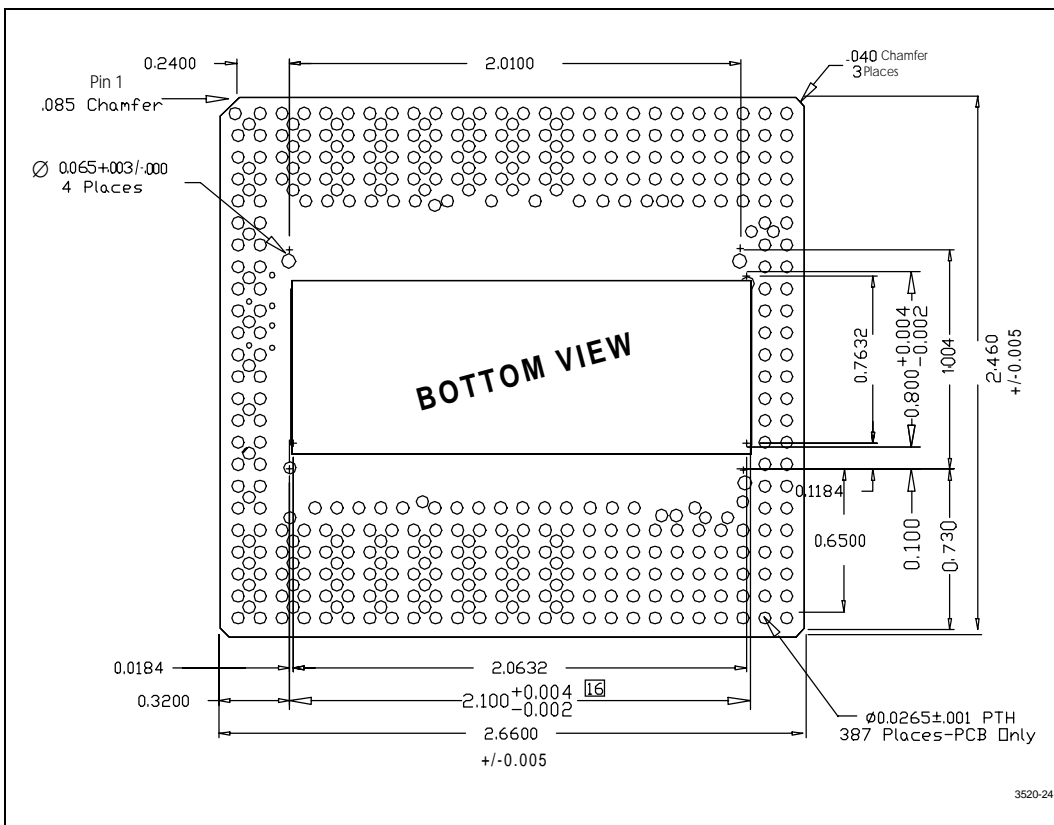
Pentium® Pro Processor with 1 MB L2 Cache Pin Side
